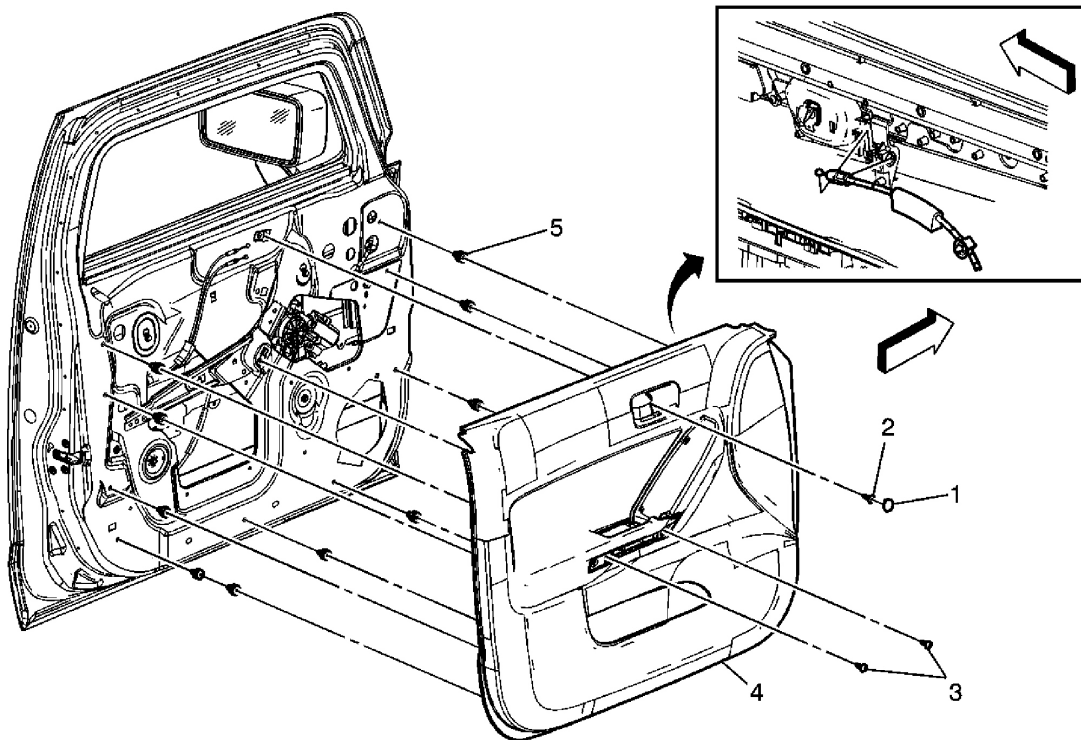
Removing/Installing Door Inside Handle Bezel
